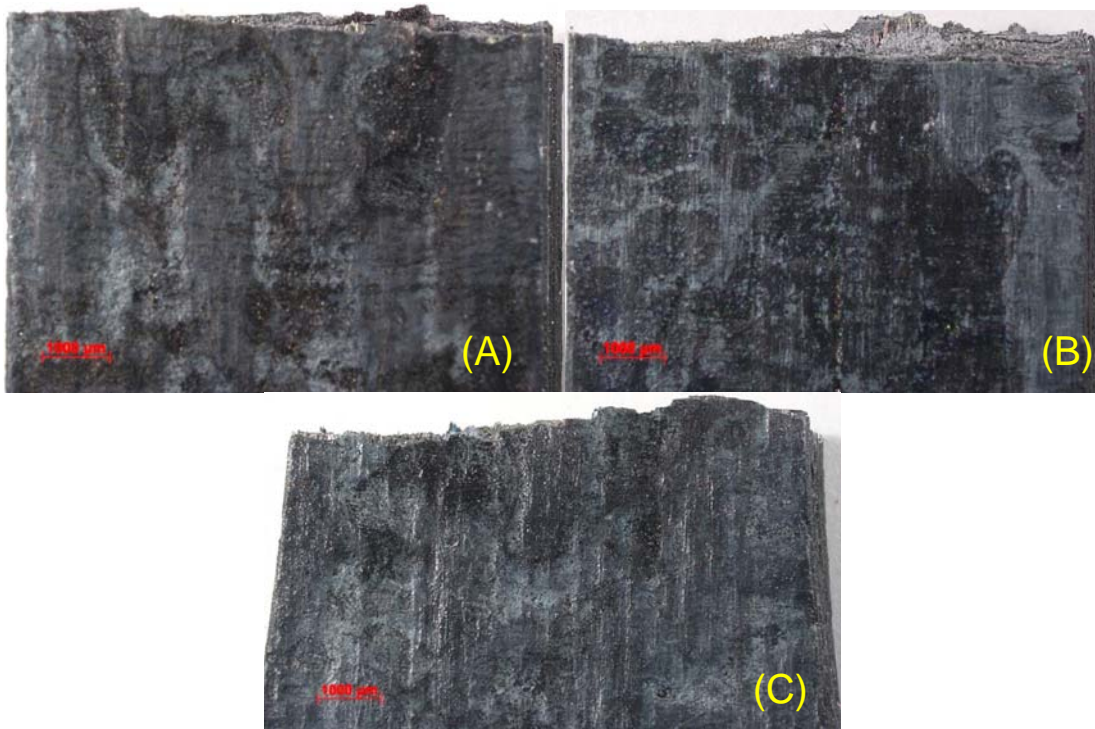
Fracture surfaces of composite C1 specimens obtained in fatigue testing in air at 1300 °C, Maximum Fatigue Stress Level: 140 MPa (A), 120 MPa (B), and 100 MPa (C).
